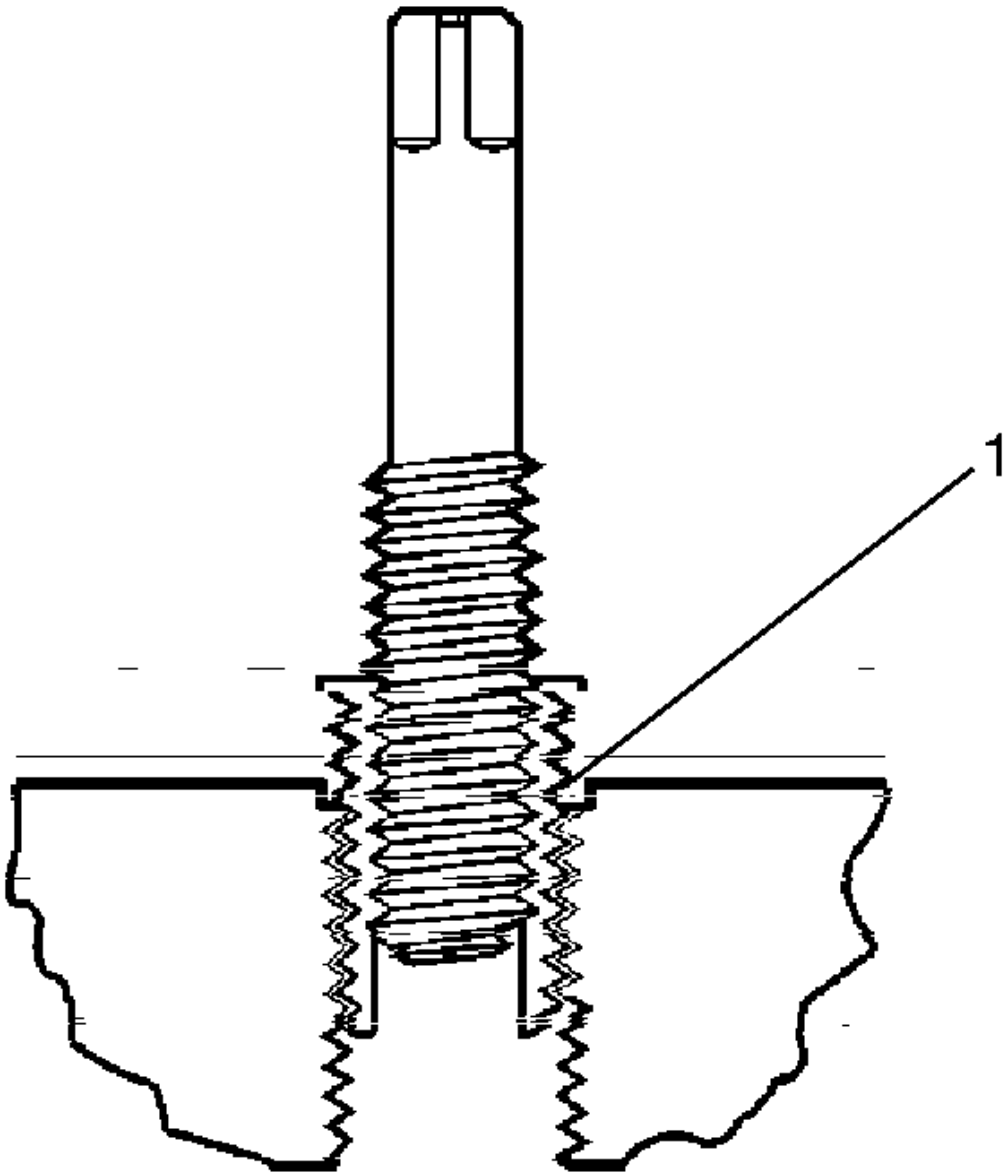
Identifying Insert & Driver Installation Tool
